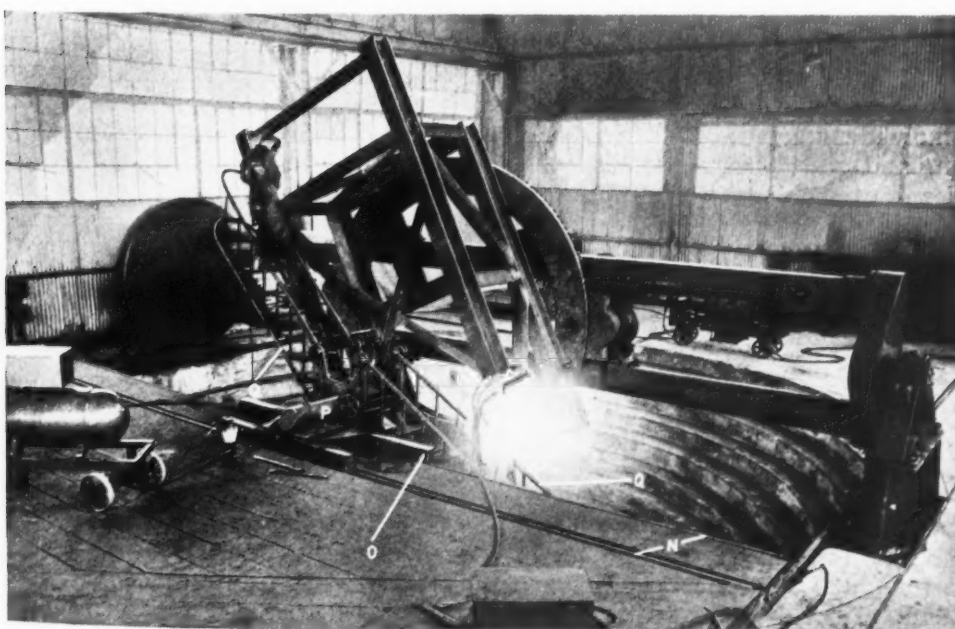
The Welding Manipulator with a Frame Being Welded Mounted on It
